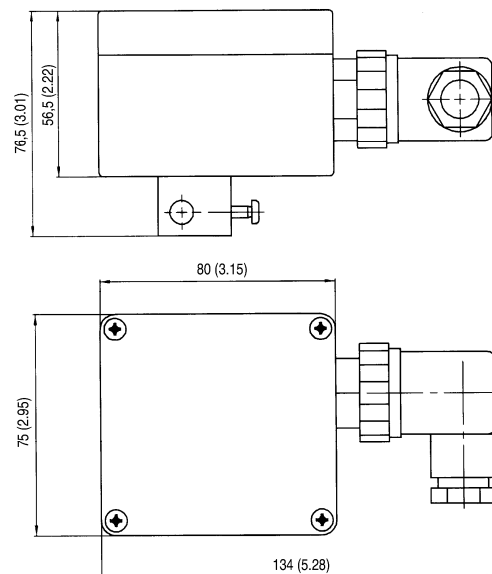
Changeover contact K23, dimensions in mm (inches)
